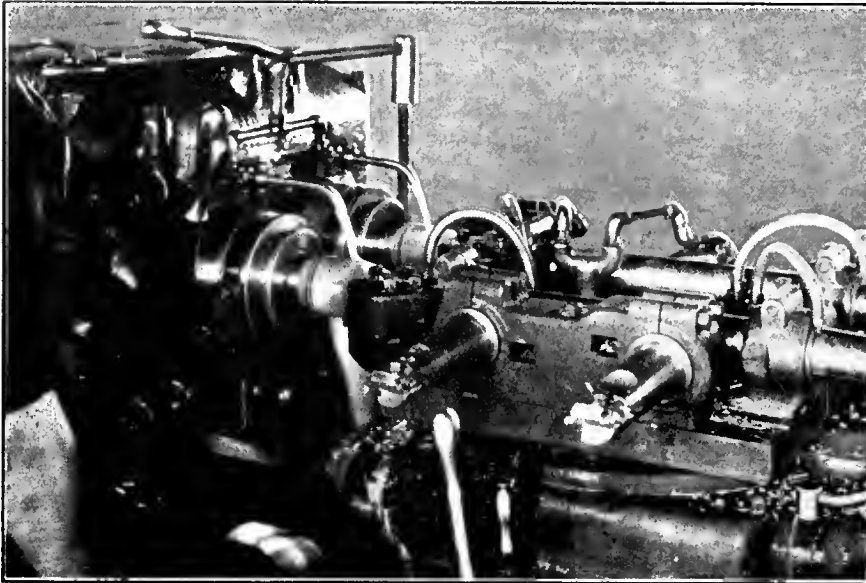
INSIDE BORING ON JONES & LAMSON DOUBLE SPINDLE FLAT TURRET LATHE
